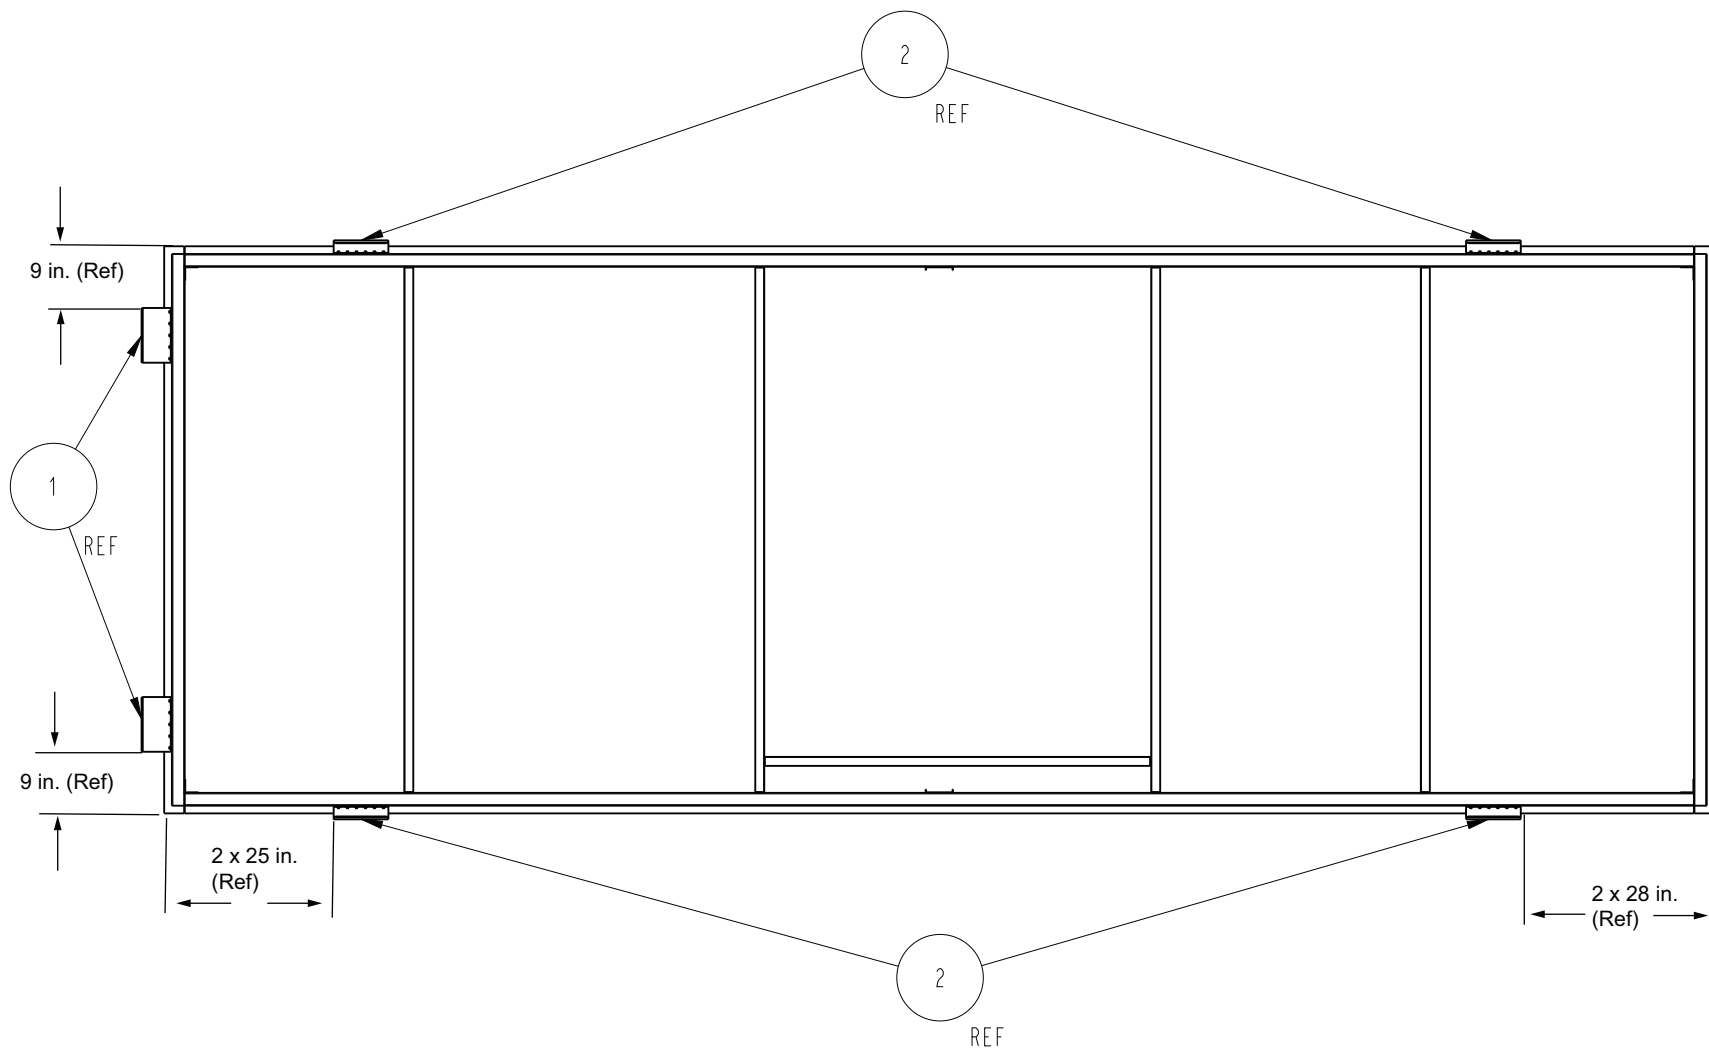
CRCNTRKT010A00 — Centering Kit for Compact Chassis
